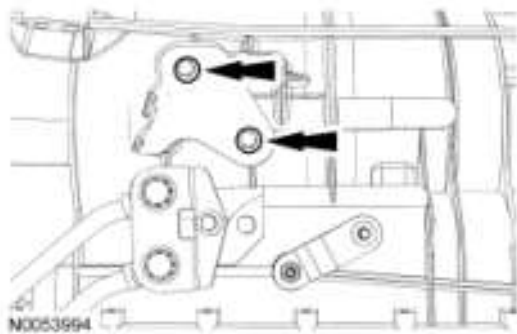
Identifying Flexplate Inspection Cover Bolts
